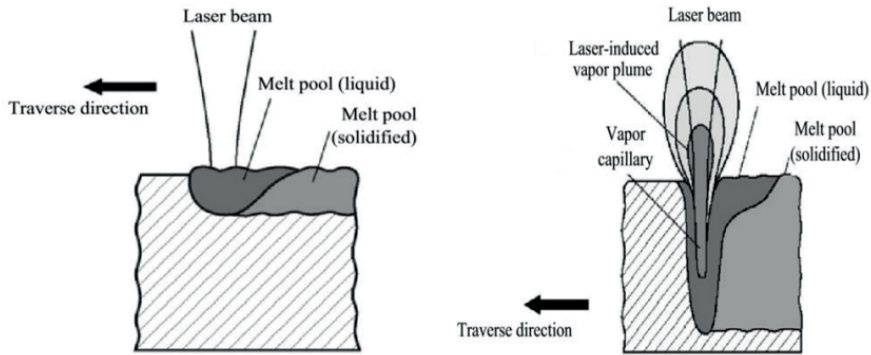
Laser welding modes: a) conduction welding and b) keyhole formation (Petring, Polzin, & Becker, 2007)
